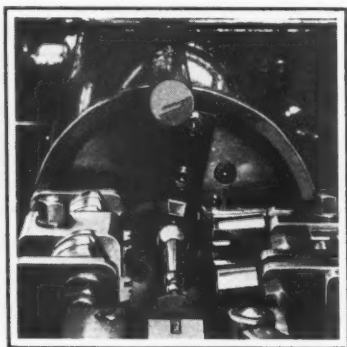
Tooling for Forming the Ball Joints of Transmission Levers
